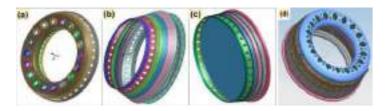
3D model of the liner sub-assemblies (a) Front part; (b) Inner part; (c) Rear part; (d) Liner Assembly
